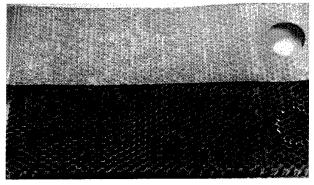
Failure surfaces resulting from peel testing of Untreated honeycomb and AF130-2 adhesive control specimen, indicating a mixture of cohesive failure and skin to adhesive failure.
